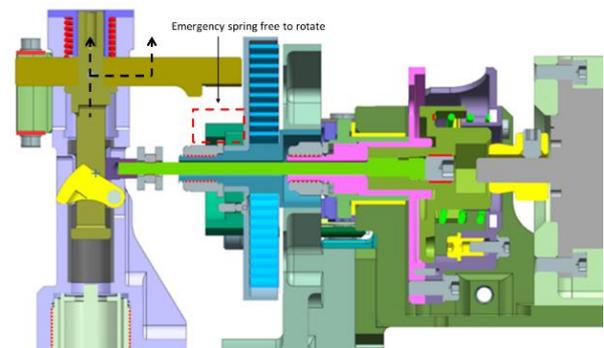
Emergency spring engaging. The dashed arrows indicate the direction of movement of the parts
